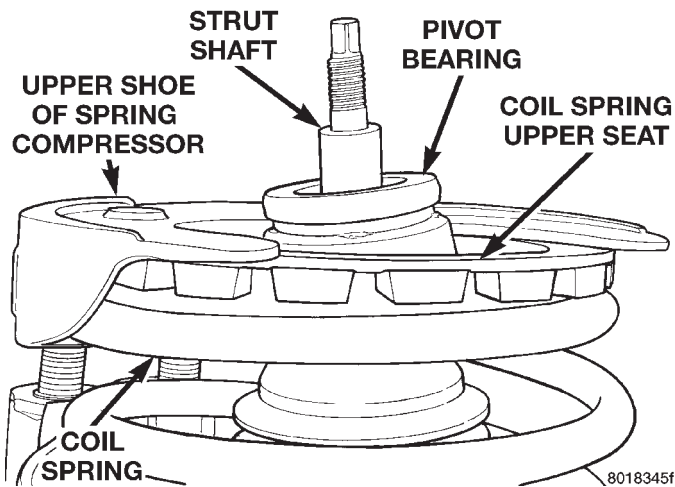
Strut Assembly Pivot Bearing And Spring Seat
